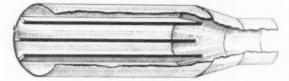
The Cammen "Bottle-Neck" Mold for Centrifugally Casting Ingots and Plate
